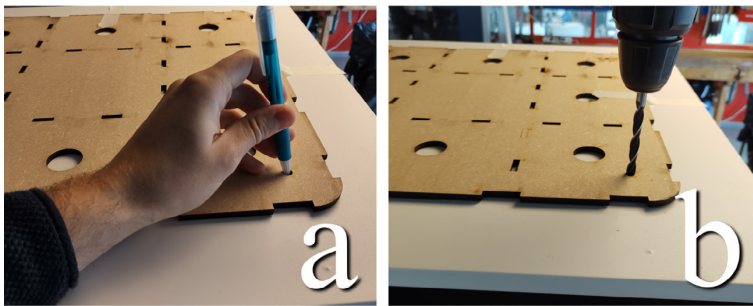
a) Mark hole pattern. b) Or use the holes to guide the drill bit.
